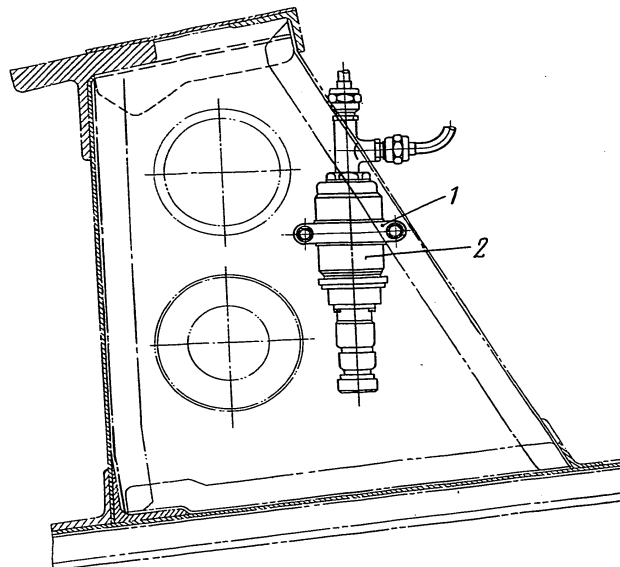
INSTALLATION OF ELECTRICALLY OPERATED PNEUMATIC VALVE CONTROLLING
